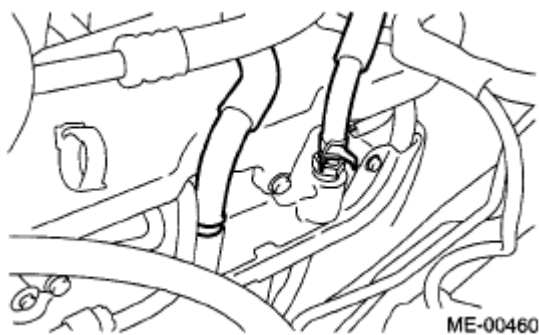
Identifying PCV Hose And Rocker Cover (LH)
